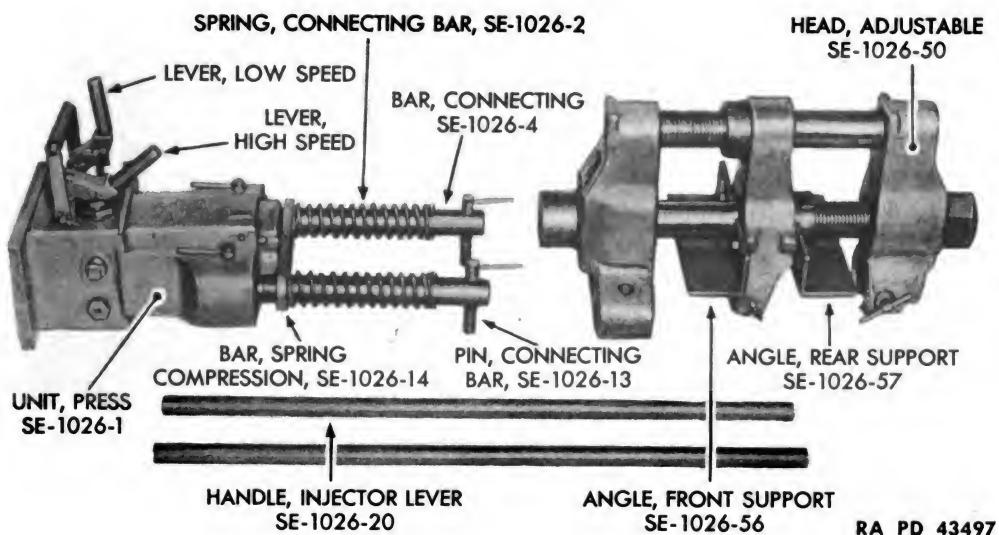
Portable Hydraulic Track Pin and Bushing Press with Adjustable Head
